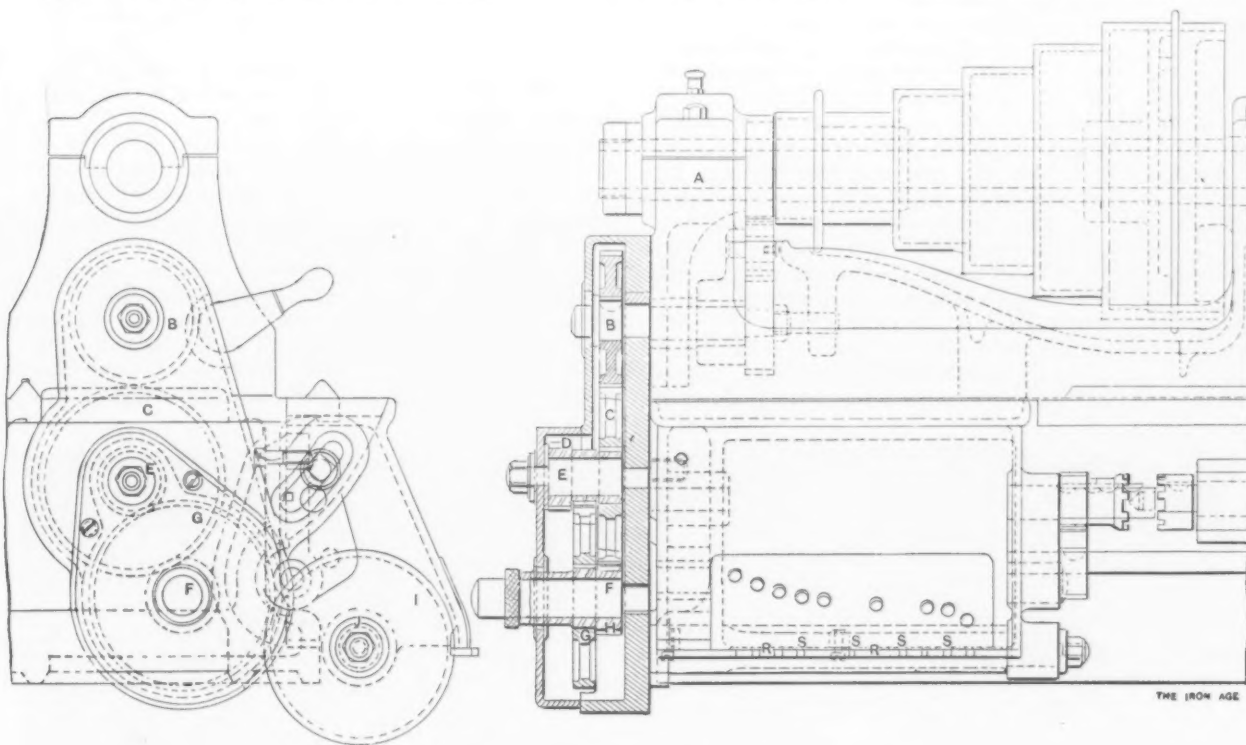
Detail of the Head of the Flather Quick Change Feed Lathe.
